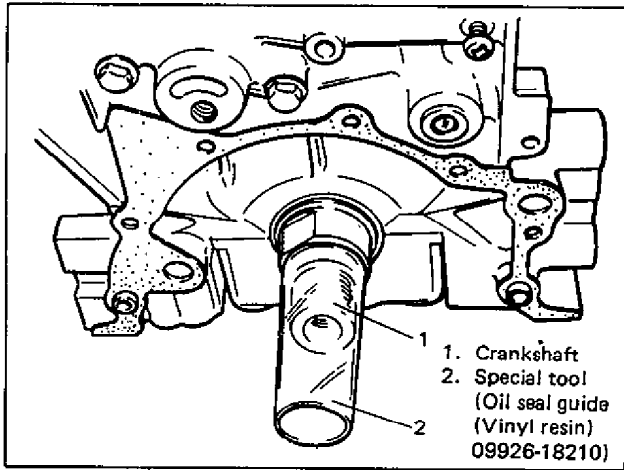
A-54 Special Tool (Oil Seal Guide) Installation
